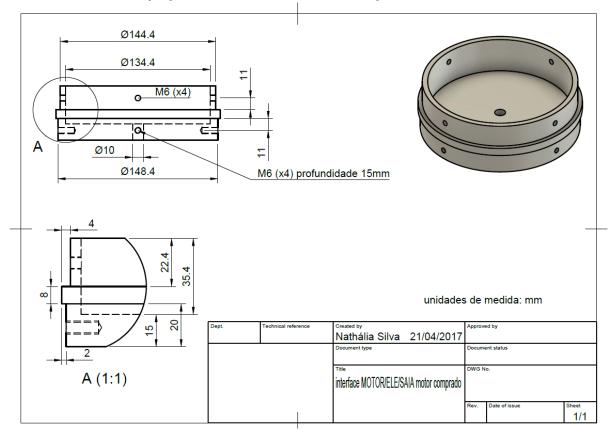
Joint between the payload and propulsion sections technical drawing.
